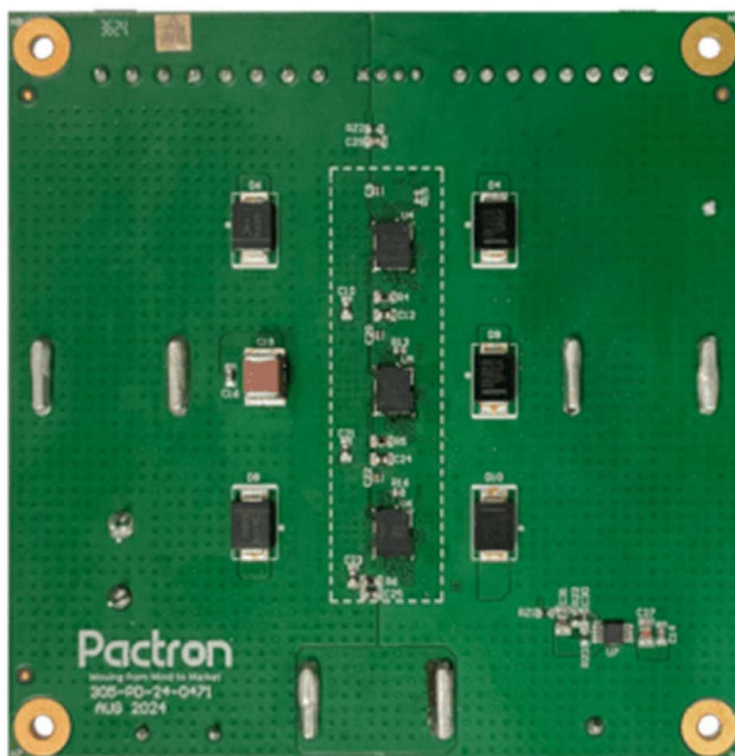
TIDA-050090 Reference Design: Bottom View
